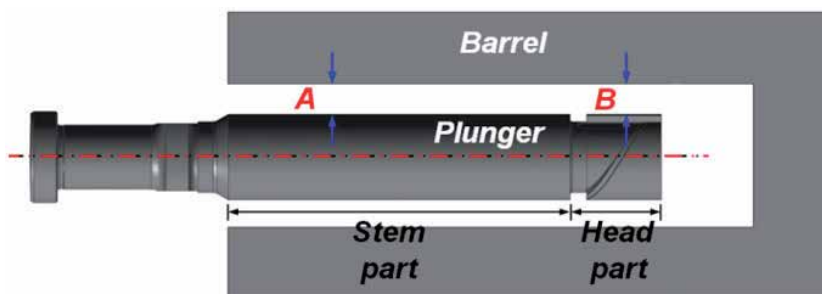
Dimensionless clearance of stem part (A) and head part (B) [11].
